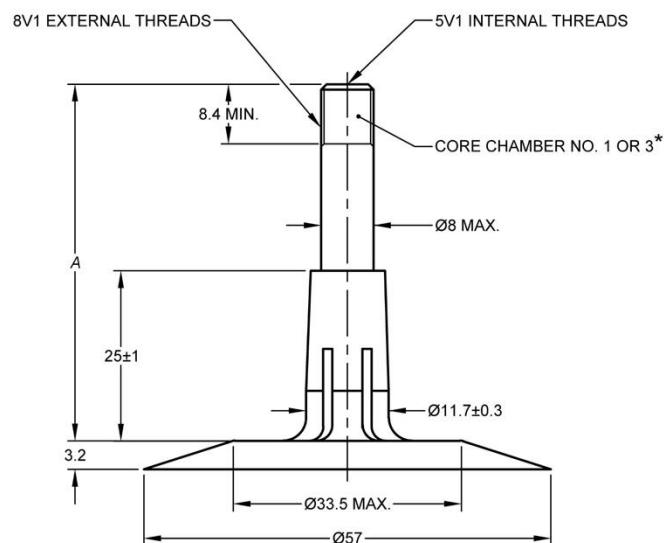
TUBELESS CLAMP-IN TRACTOR VALVE AIR-WATER FILLING TYPE (SEE FIG. 21 FOR ASSEMBLY)
